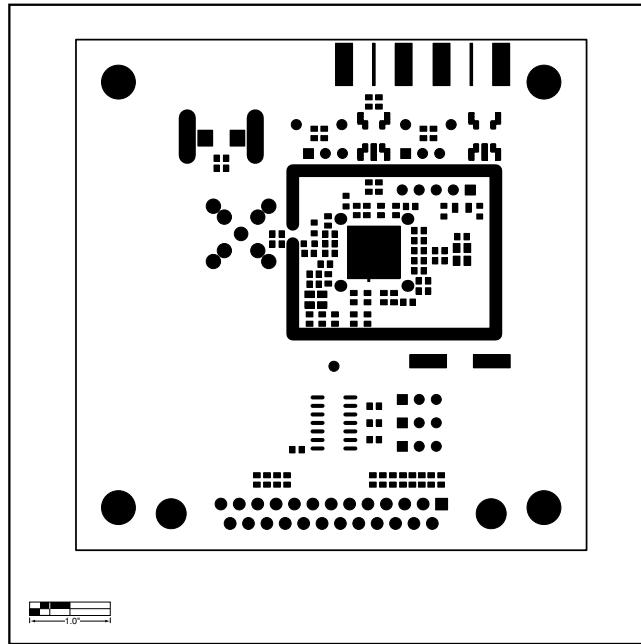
MAX355/MAX357 EV Kit PC Board Layout—Top Soldermask
